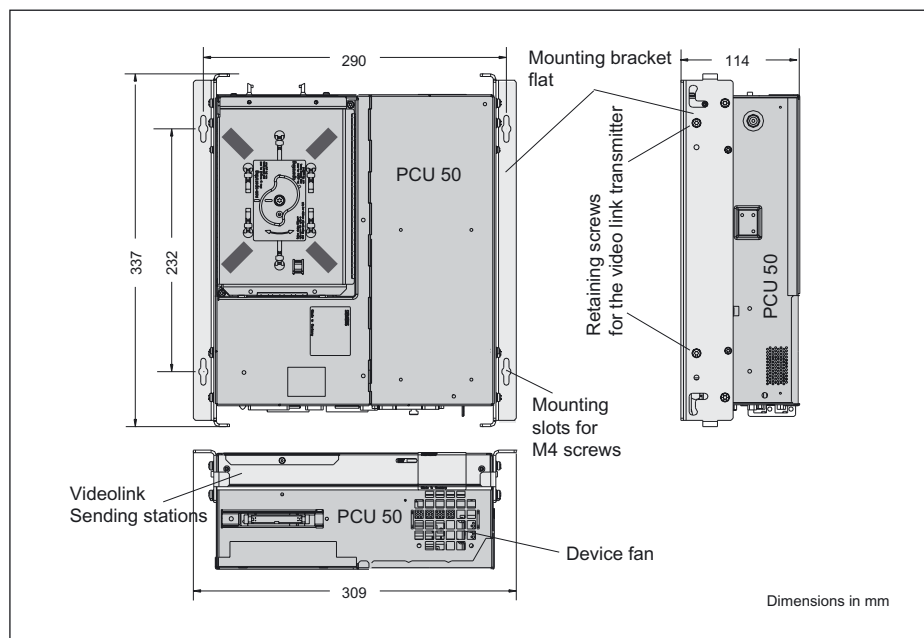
Joining of PCU 50 and videolink transmitter using the flat mounting brackets
